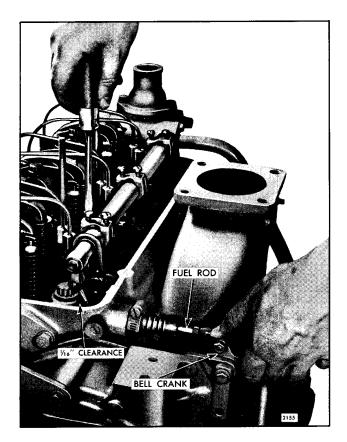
Setting Fuel Rod to Cylinder Head Clearance
